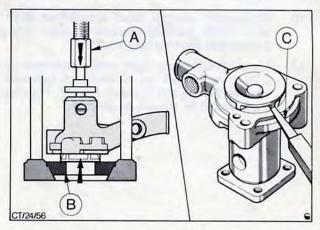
Pressing impeller onto shaft and checking clearance with feeler gauges
